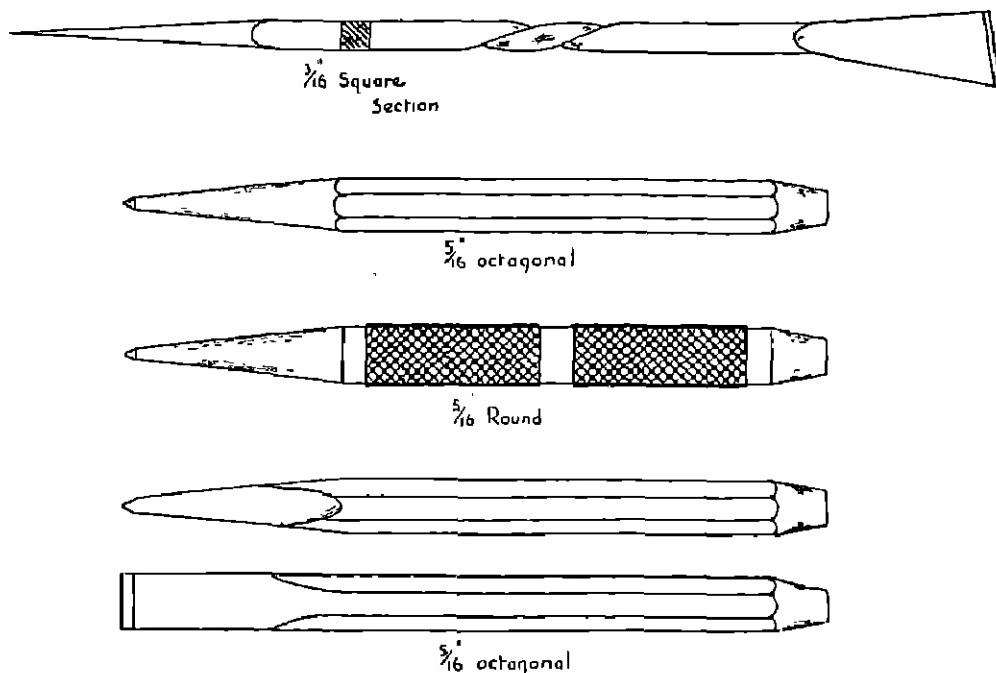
WORKING DRAWINGS OF CENTRE PUNCH, SCRIBER AND COLD CHISEL
